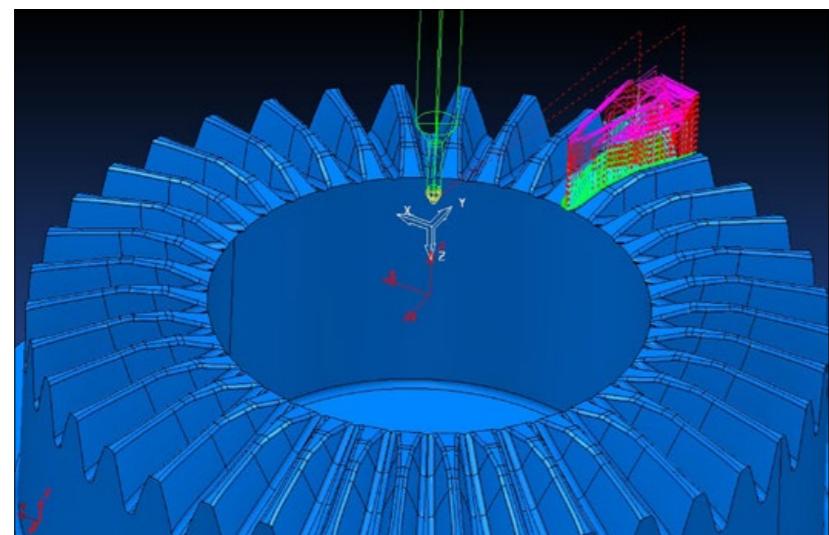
Modern CNC milling machines coupled with the latest CAD/CAM software, can produce complex geometry (Courtesy Mechworx Ltd)
